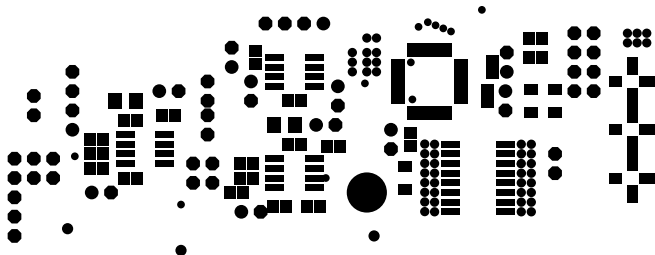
1 MHz 16-bit A/D board bottom solder mask.
